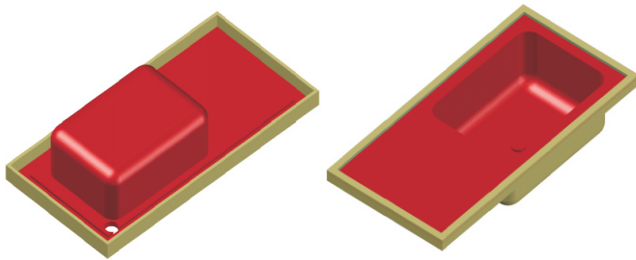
3D Design of a Two-part, Matched Prototype Wooden Mold
